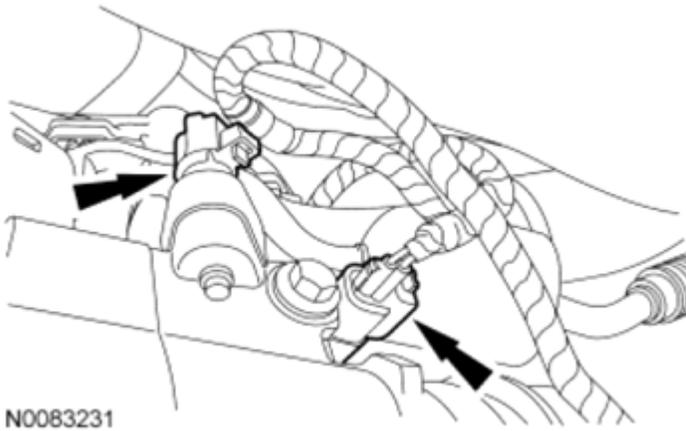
Locating A/C Compressor Electrical Connector And Wiring Harness Retainer
